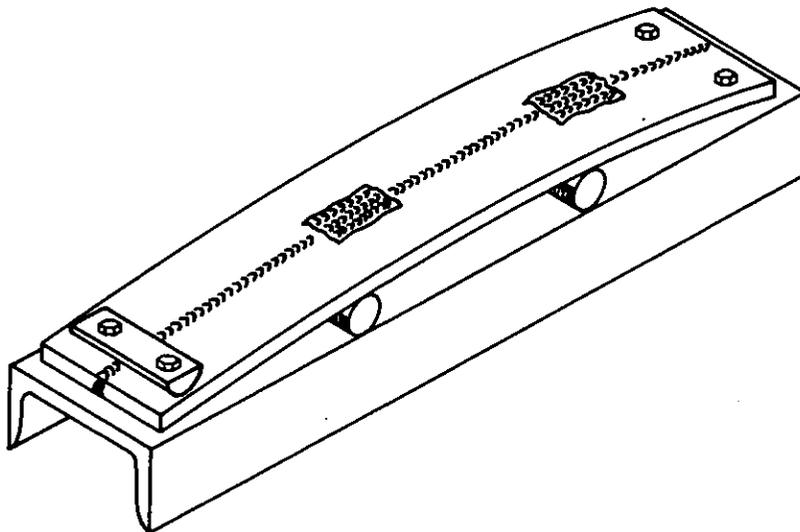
STRESS-RELIEVED SPECIMEN RESTRESSED ON CHANNEL BEAM SPECIMEN HOLDER
